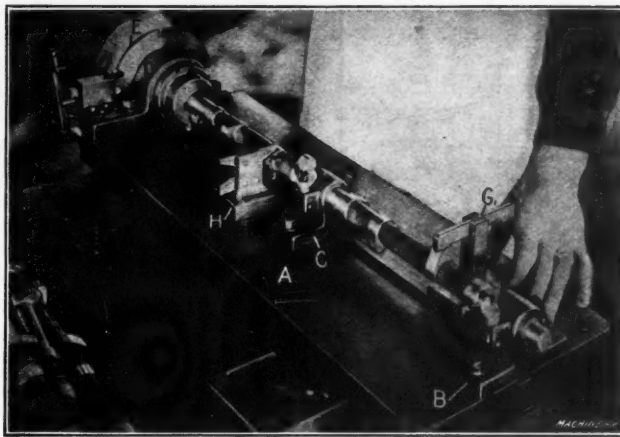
Simple Type of Gas Engine Cam-Testing Fixture for determining Shape of Cam, Angularity, Lift, etc.
